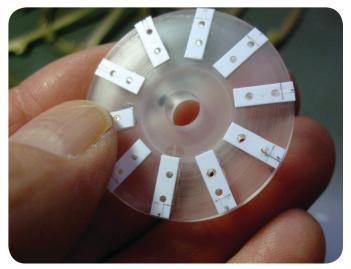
The addition of the mounts for the cross braces which will receive the inboard end of the cross brace.
